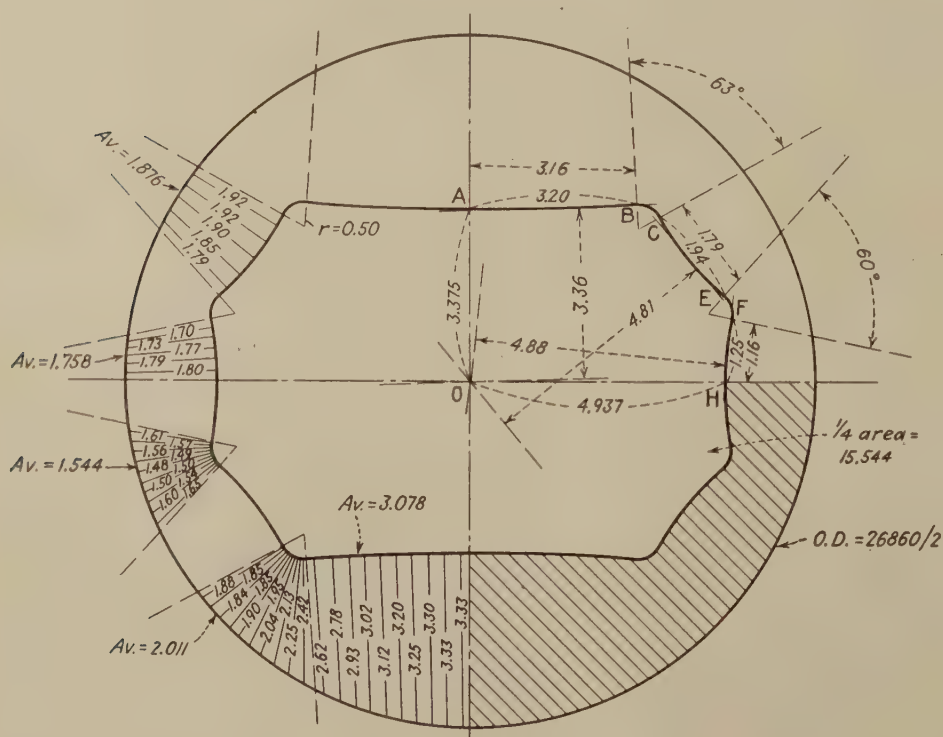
Cross-section under the hot top of a short 14x20-in. ingot.
